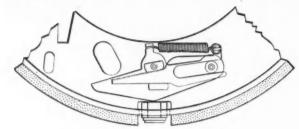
Detailed view of adjusting wedge showing how the spring accomplishes self adjustment through contact plug
